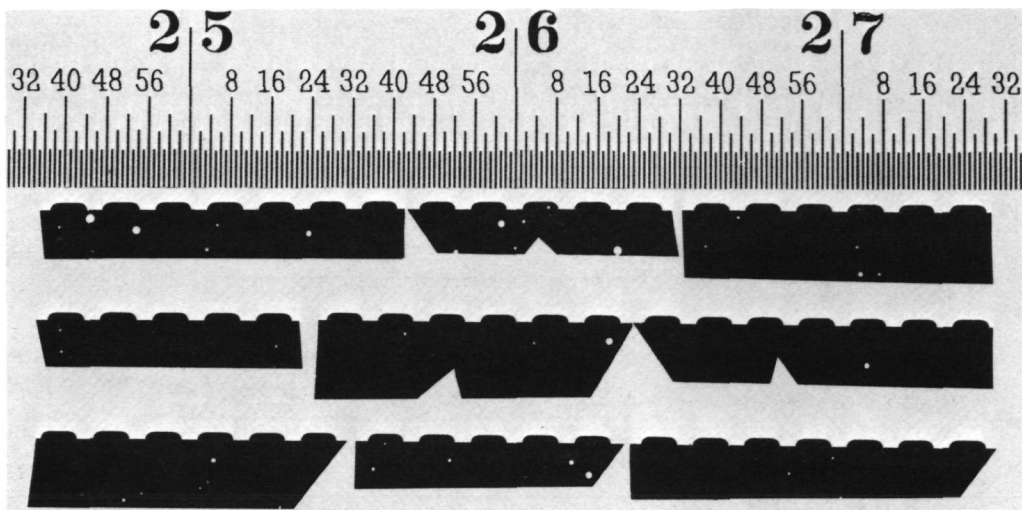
Section Views of Etched Plate Showing Typical Wide Passage Shape
